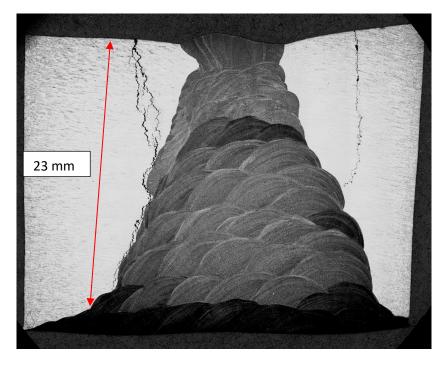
23 mm deep IGSCC crack discovered on a weld of Penly reactor safety injection system, on a part of the weld that had been repaired during the manufacturing.
